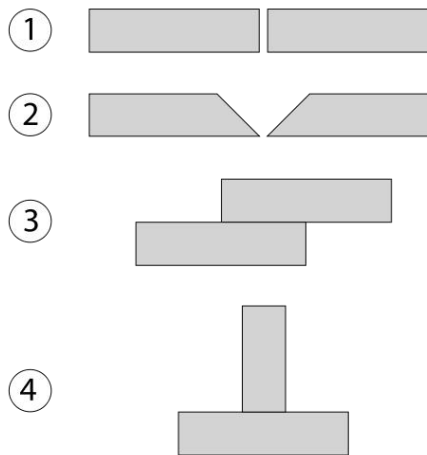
Common welding joint types – (1) Square butt joint, (2) V butt joint, (3) Lap joint, (4) T-joint
